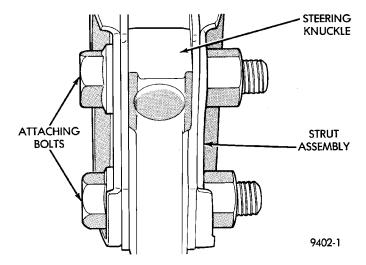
Strut To Steering Knuckle Attaching Bolts
